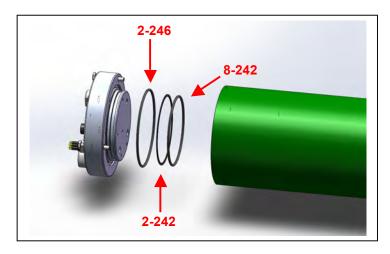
Controller Housing Top End Cap, with O-Ring Seals
